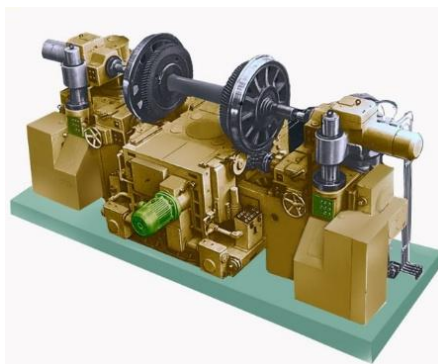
Heavy-duty lathe model KZh1832 (manufactured by the Kramatorsk Heavy Machine Tool Plant)
